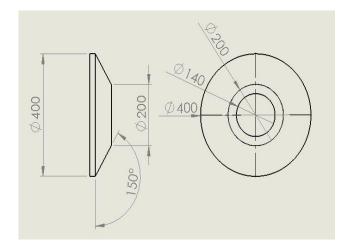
Air Inlet Pipe at 30° Inclined Horizontally and Vertically-Cooling Tower Model
